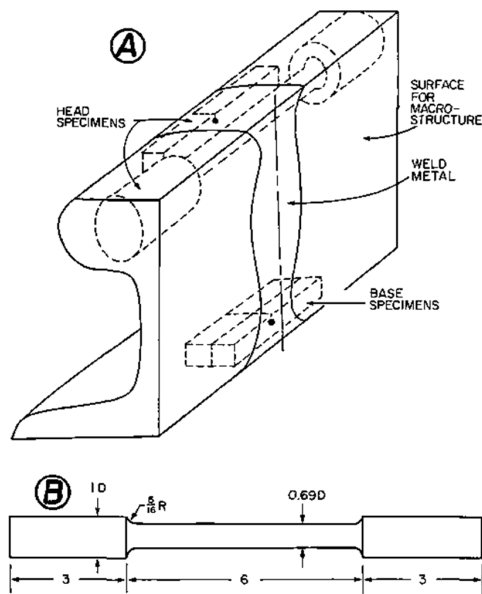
Test plan for mechanical tests of thermite weld metal
